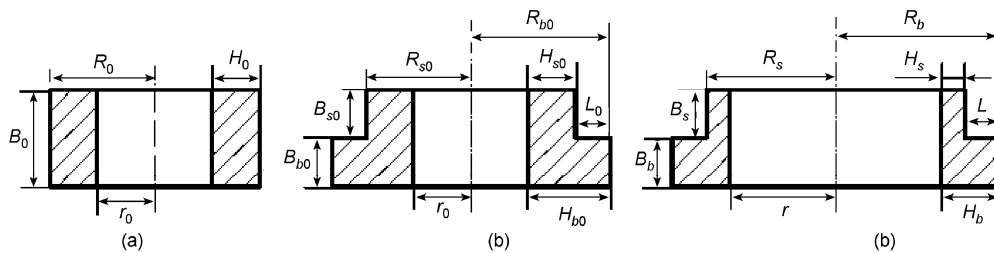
Blanks and rolled ring of stepped-section profile ring rolling. (a) rectangular section blank; (b) stepped-section blank; (c) stepped-section rolled ring.
